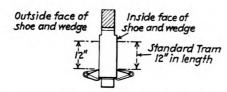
Locating layout marks on the bottom of shoes and wedges
